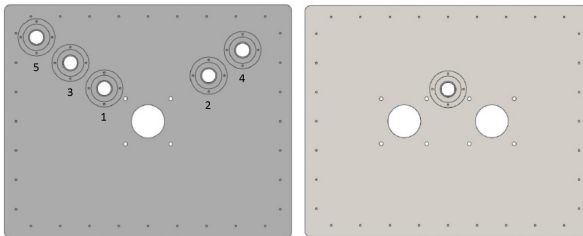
Back plate for single gear (left) and meshing gears (right) configurations
